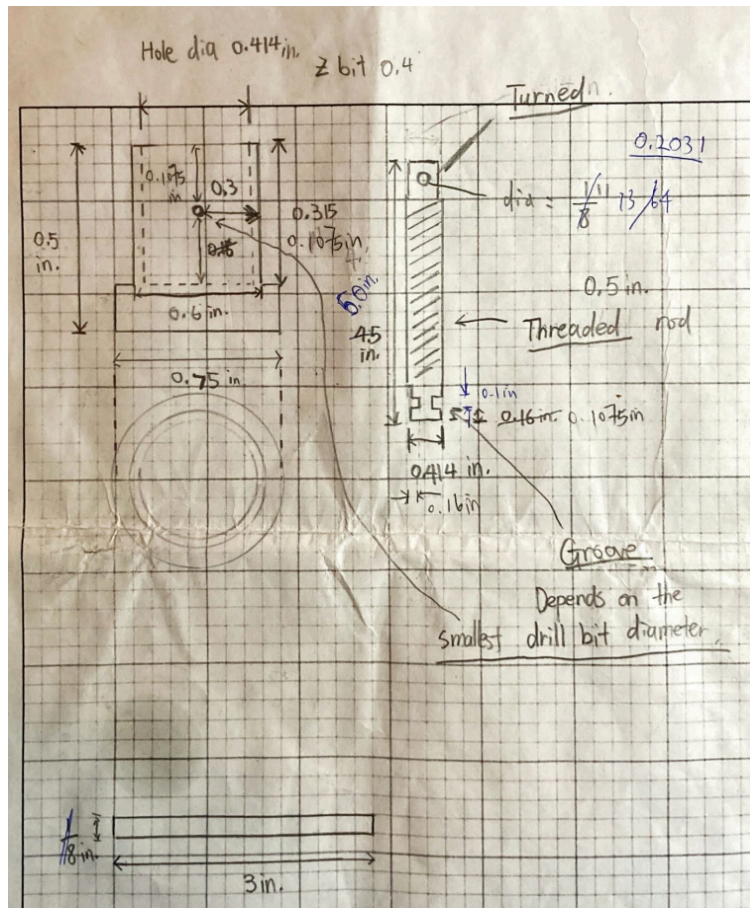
Third Orthographic Drawing for Cap, Handle and Threaded Rod with Changed Dimensions
